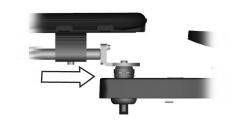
The earlier model of the parallel panel holder and the rotational panel holder is attached by a clamp.
